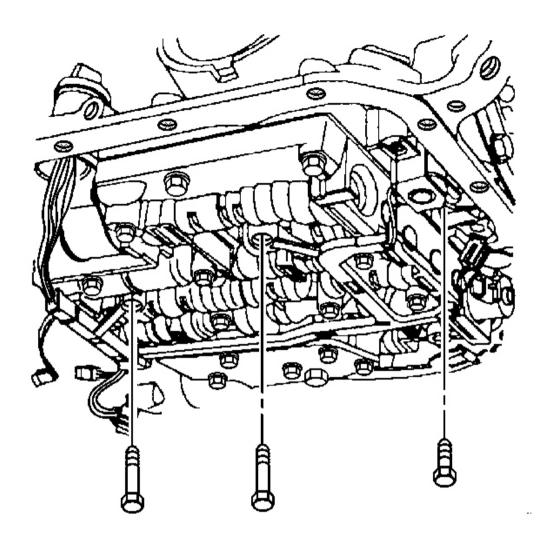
Removing The TCC Solenoid Bolts And The Valve Body Bolts Which Retain The Internal Wiring Harness
